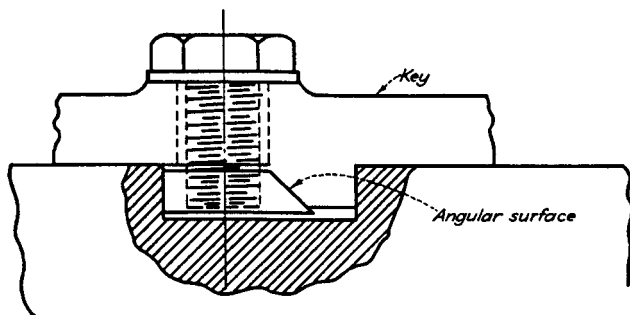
The angular surface of the nut contacts the angular side of the key, and causes it to move outward against the side of the groove. This exerts a downward pull on the clamped part due to the friction of the nut against the side of a groove as the nut is drawn upward by the screw.
